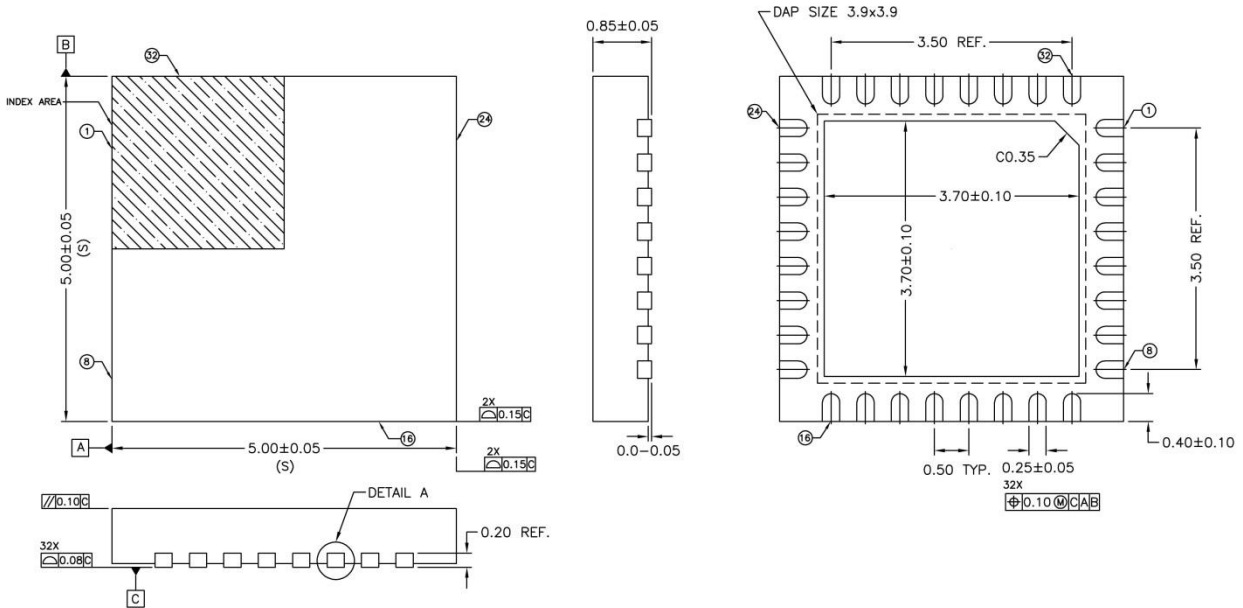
QFN-32 package outline, $5 \times 5 \times 0.9$ mm³, 0.5 mm lead pitch
